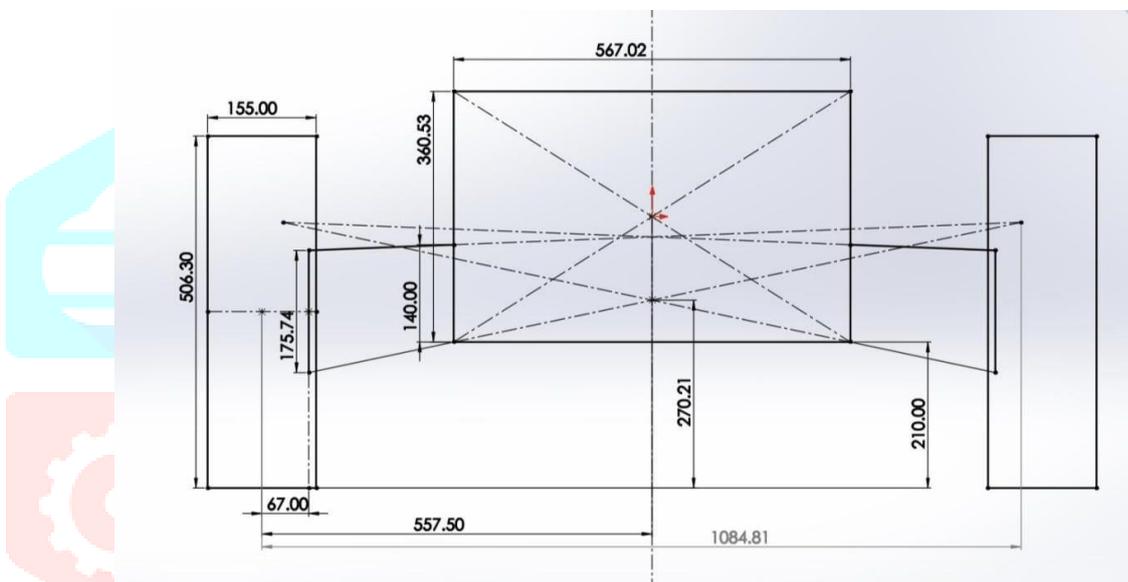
Image of CAD of Rear Suspension 2D Geometry
